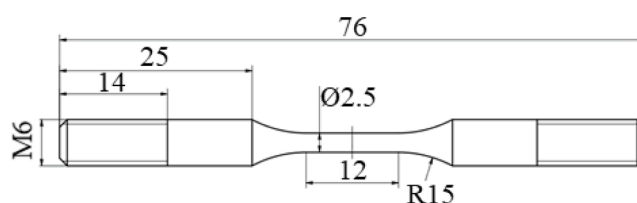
Geometry of the fatigue specimen, dimensions given in mm.
